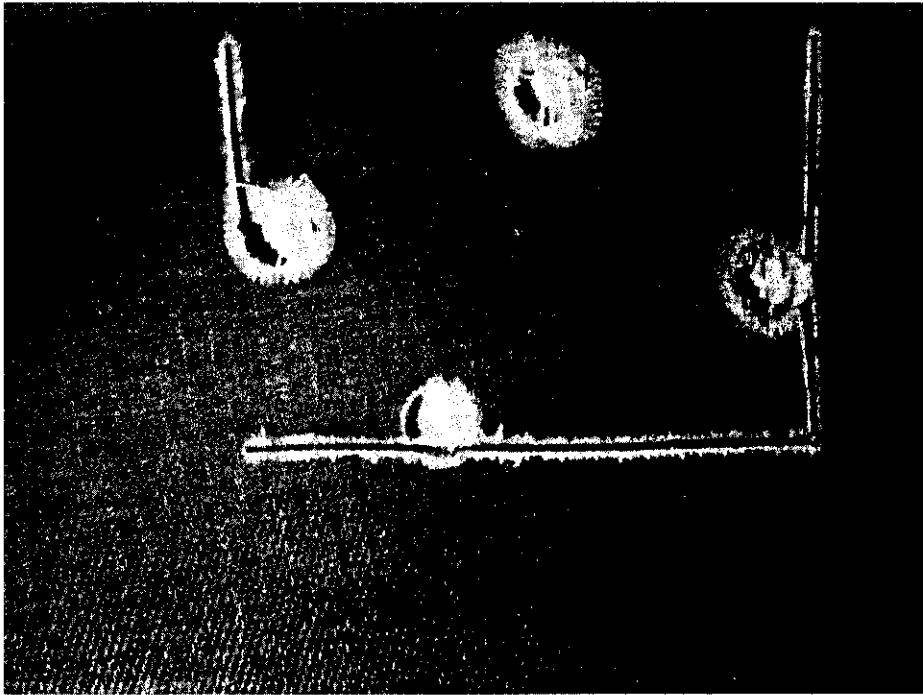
DELAMINATION BY IMPROPER MACHINING
